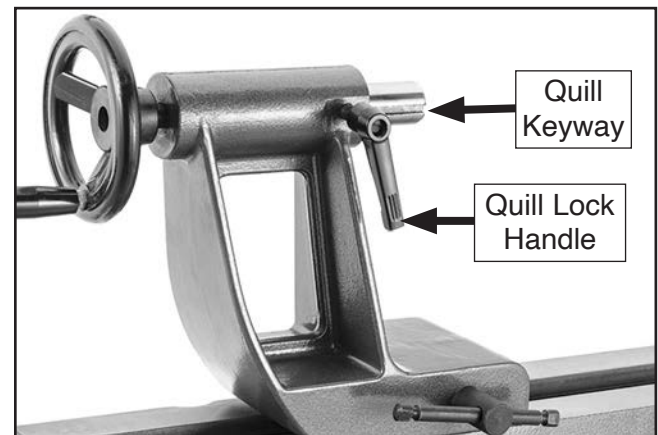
Quill keyway aligned with quill lock handle (center not shown for clarity).
